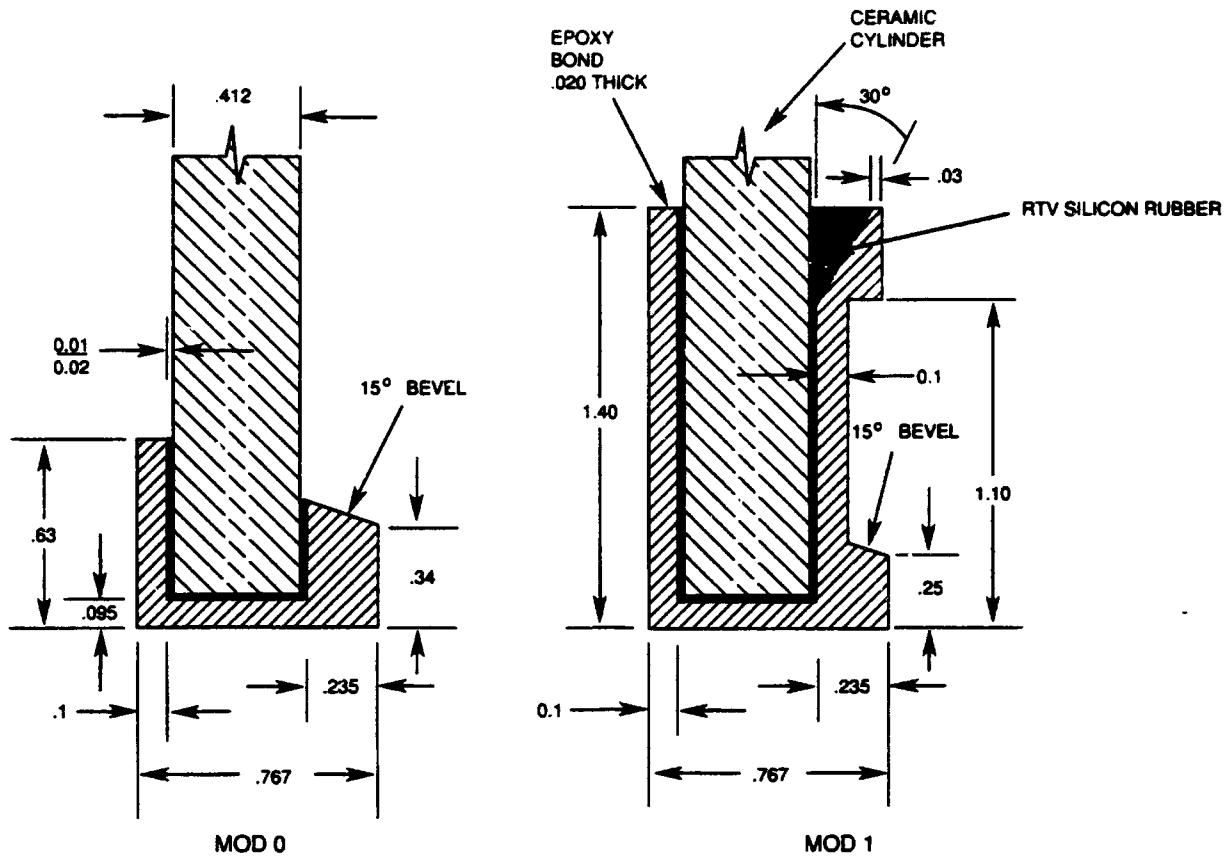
End caps for 12-inch-diameter ceramic cylinders. The Mod 1 end cap significantly reduces the formation of fatigue cracks on the plane-ceramic bearing surface.
